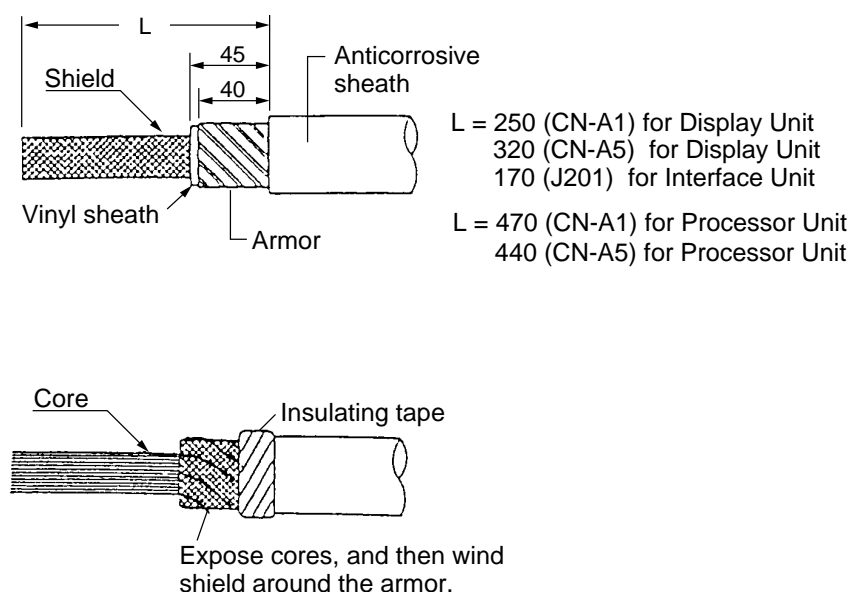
Fabrication cable 00-8016-038-313-761HV
